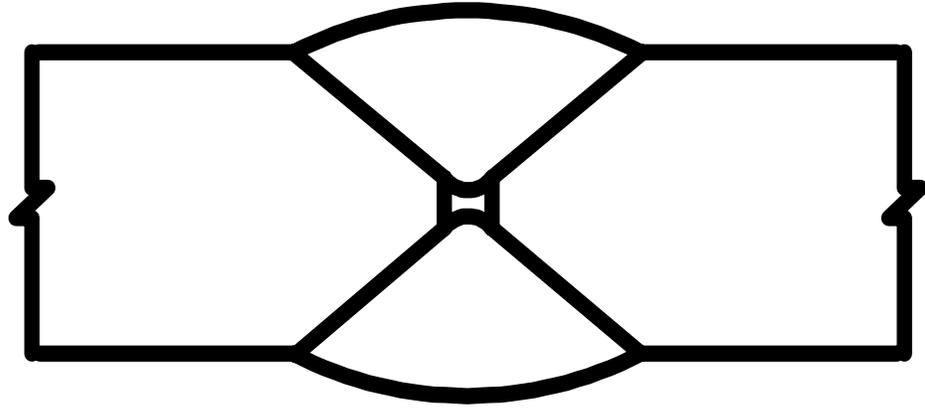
Incomplete Penetration of a Double V-Groove Weld
